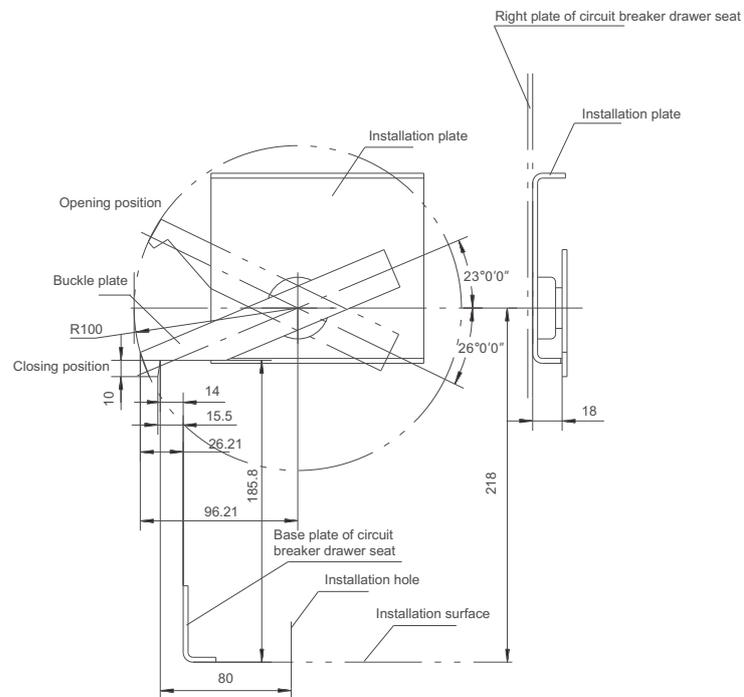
NA8G-2500~6300 withdrawable type circuit breaker status door interlock installation dimensions
